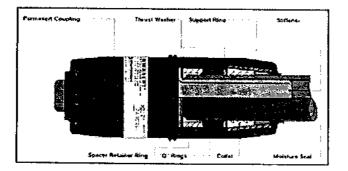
Stab Type Fitting 2.10 Mechanical Bolt Type Couplings
